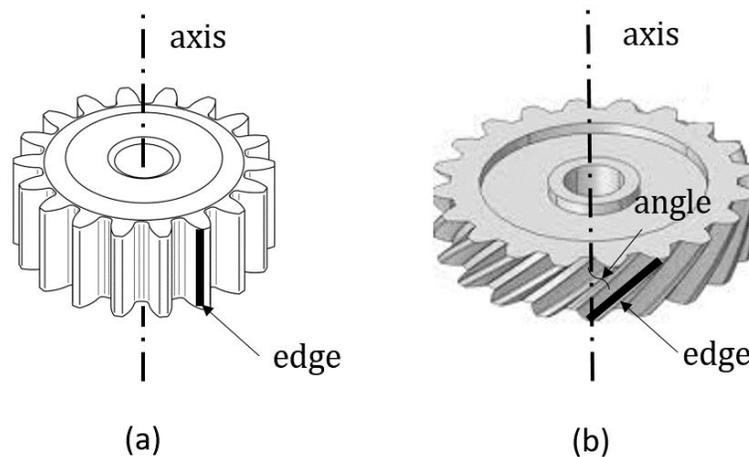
Gear tooth comparison a) spur gear b) helical gear
